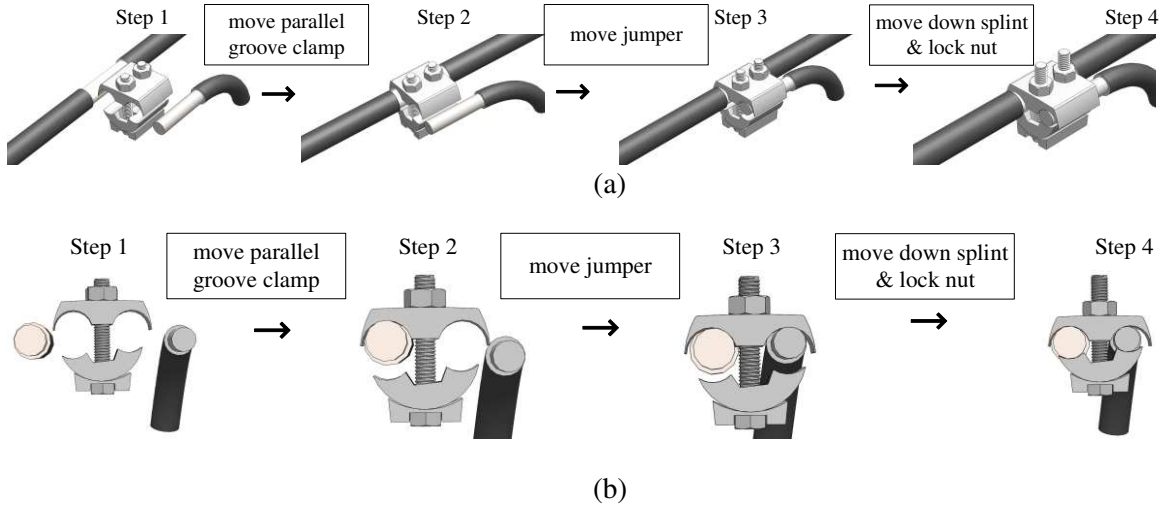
Assembly steps. (a) 3D view; (b) cutaway view.
